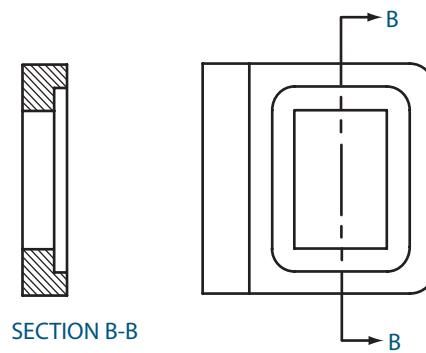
An engineering drawing with a section view to reveal interior detail.
